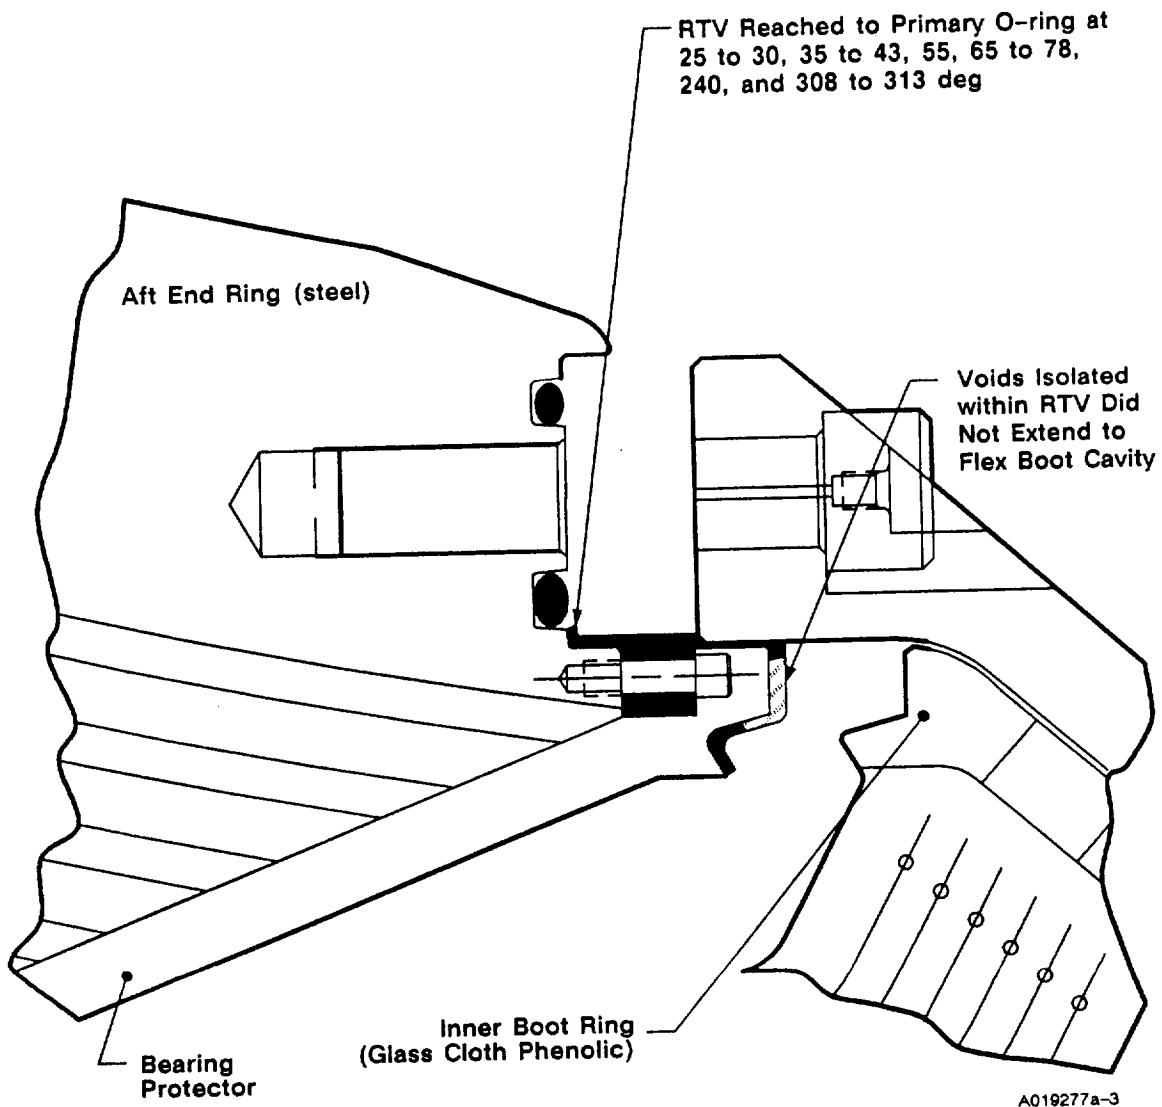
STS-26A—Flex Bearing/Fixed Housing Joint
